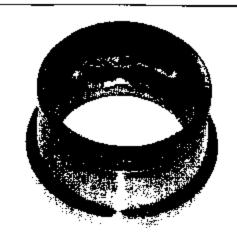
918279-B (IB) showing rather strong fretting corrosion in the position where the load had been applied. The 918279-A (OB) ring had no fretting.
